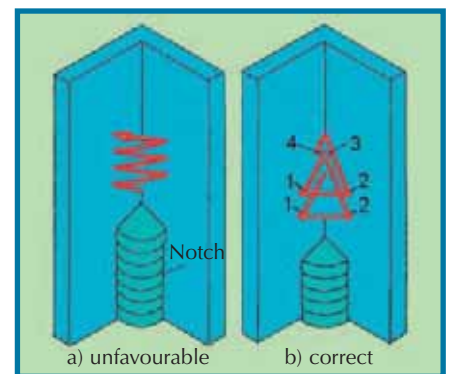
Stick electrode manipulation during the vertical-up welding of fillet welds.
